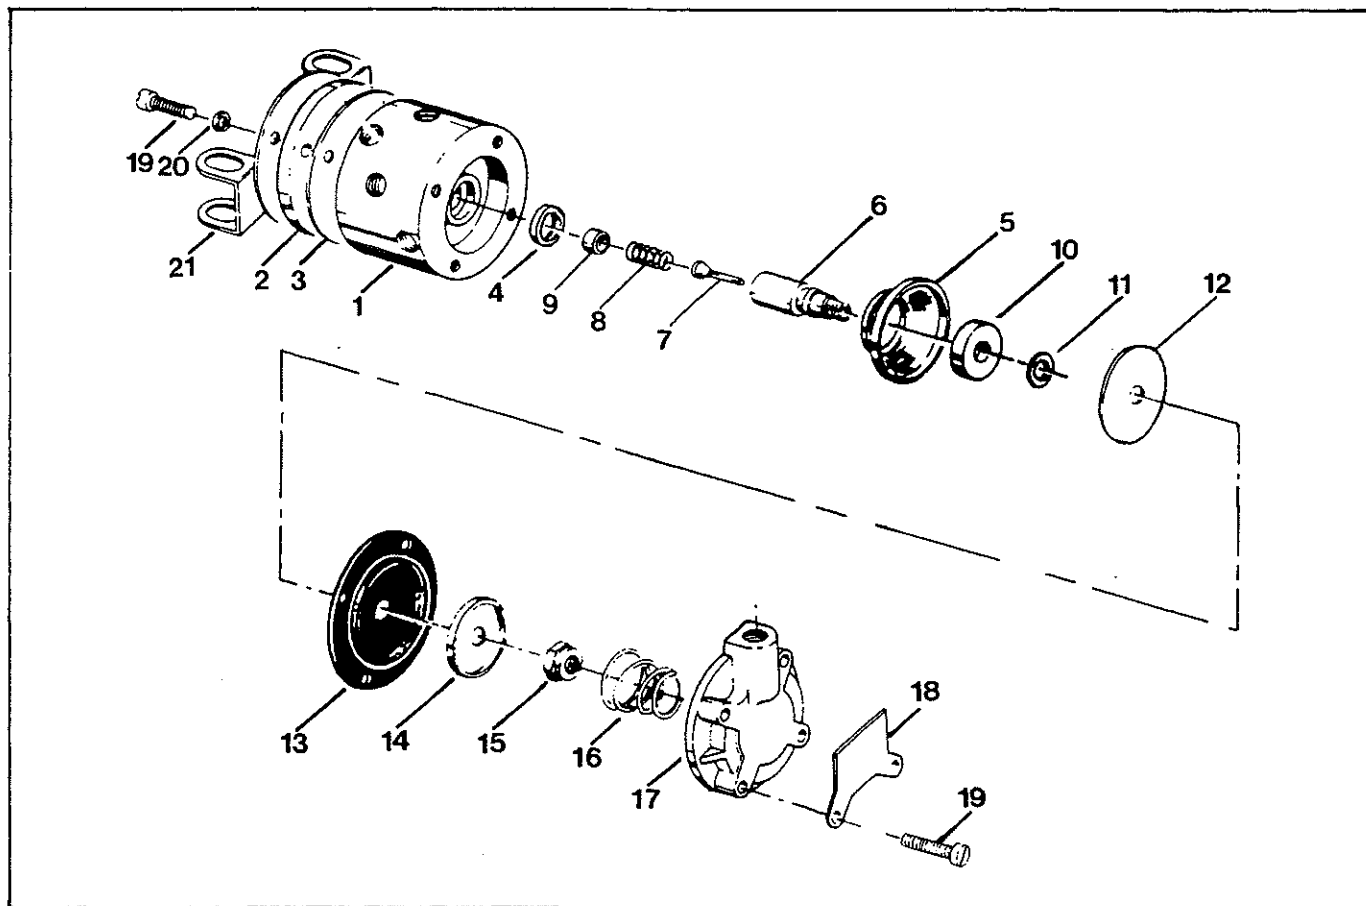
FUEL MANIFOLD VALVE ASSEMBLY.
